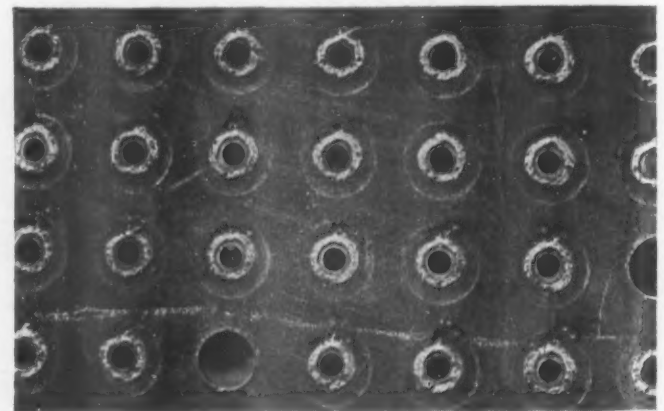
Renewing staybolt holes by welding in tapered bushings, then drilling and tapping threads; 35 holes prepared per hour
